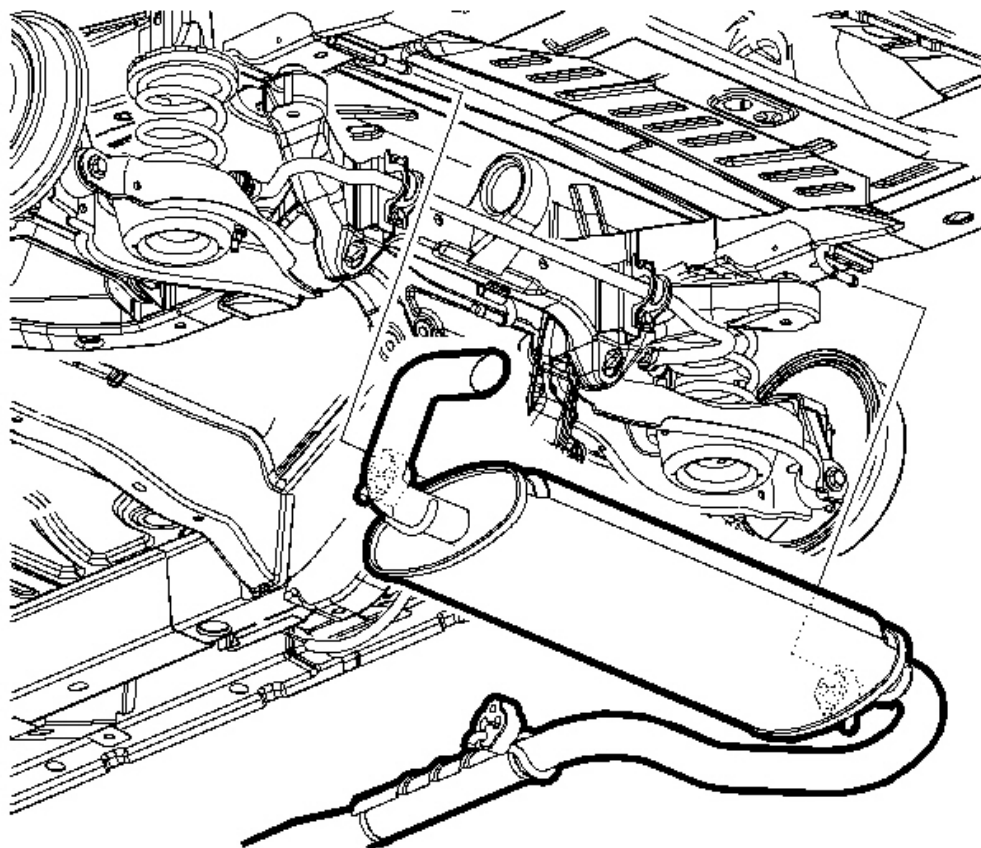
Installing Intermediate Pipe & Muffler Assembly
